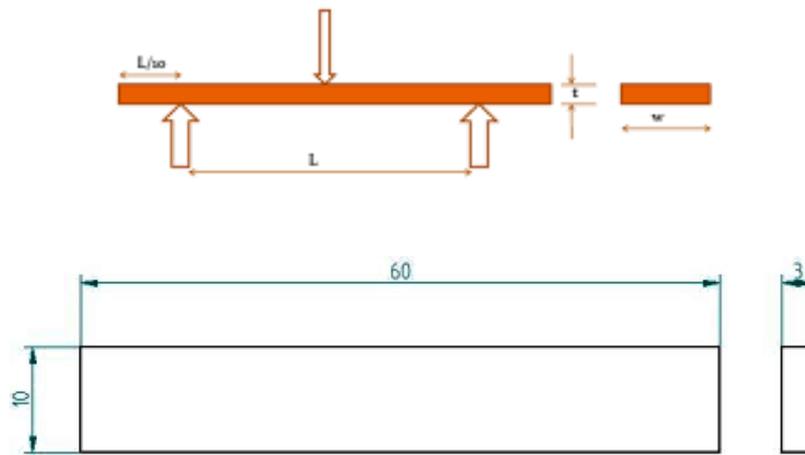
Specimen Dimensions as per ASTM D790 for Flexural Test
